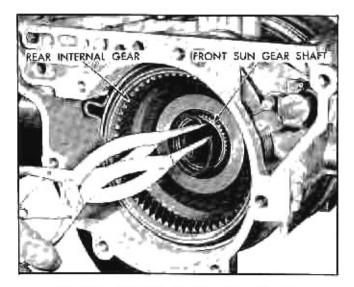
Installing Front Sun Gear Shaft to Rear Internal Gear Snap Ring
